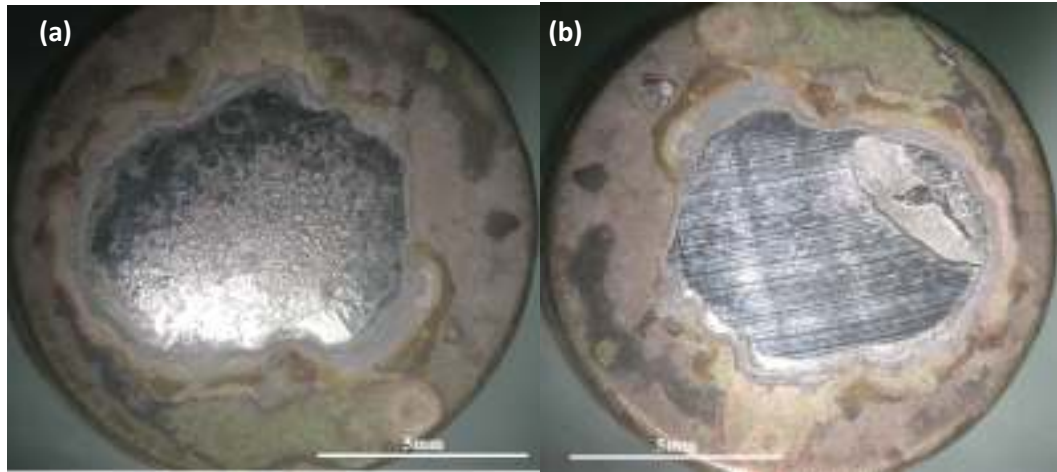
Macroscopic images (top view) of stabilized Sn-2.5Ag-0.5Cu solder on Cu substrate with Ag finish (a) before shear (b) after shear
